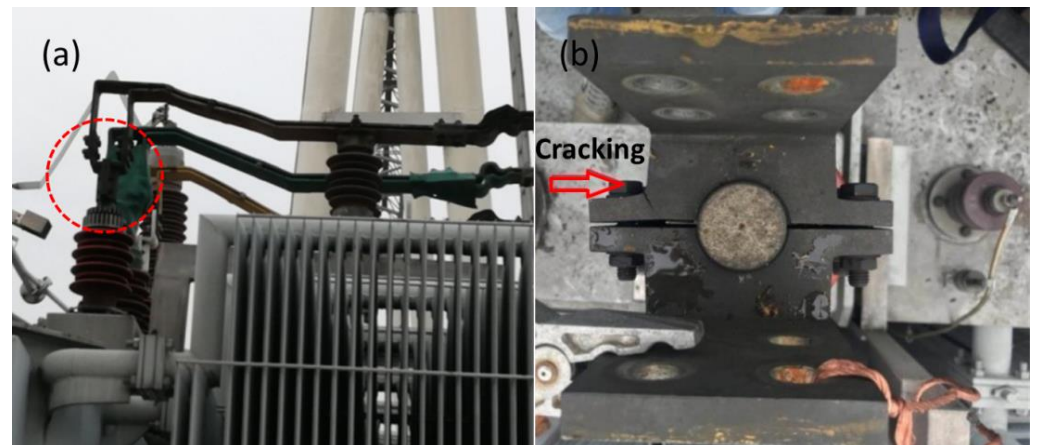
(a) The brass bushing clamp mounted on the main transformer. (b) General view of the cracked brass clamp.
